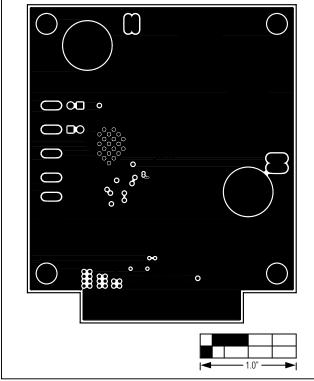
MAX15118 EV Kit PCB Layout—Inner Layer 5
